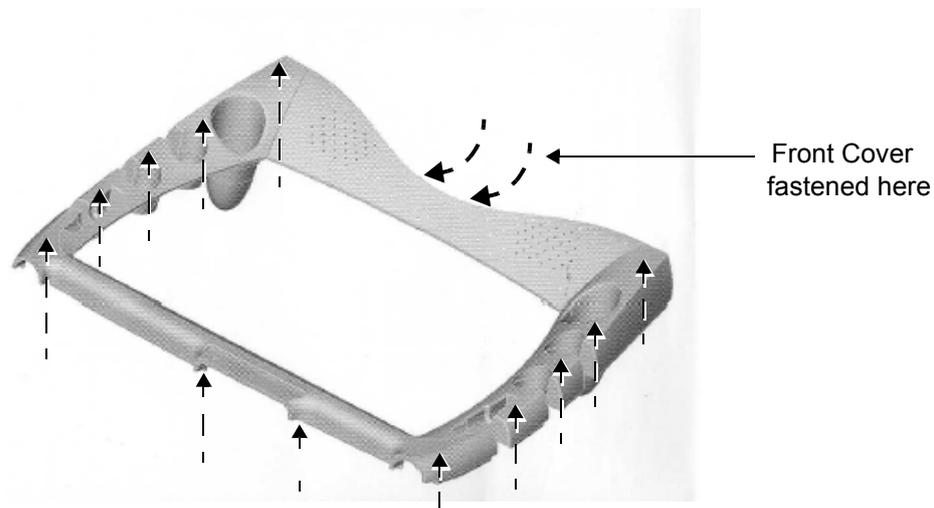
Location of Screws on the Control Console Upper (Front) Cover
